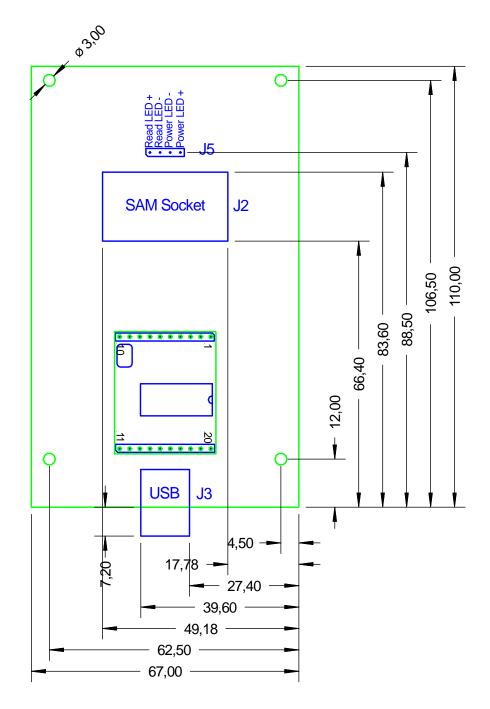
5553 Reader USB Comfort Multi ISO - Top View
